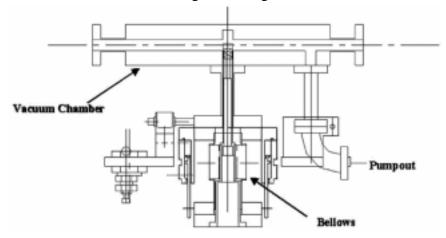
This cross-section drawing shows a plan view of a partially inserted probe assembly with its actuator attached to the vacuum chamber. The electron beam would move left to right on the page.
